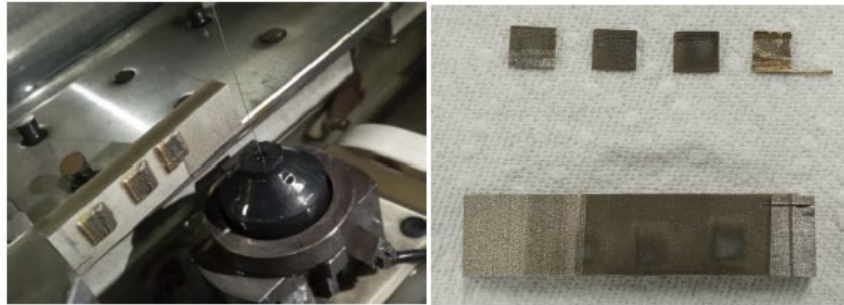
AM samples for corrosion test being detached from substrate using wire electro-discharge machining (left) and after being detached (right).
